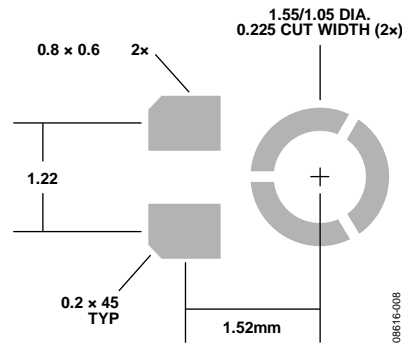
Suggested Solder Paste Stencil Pattern Layout
